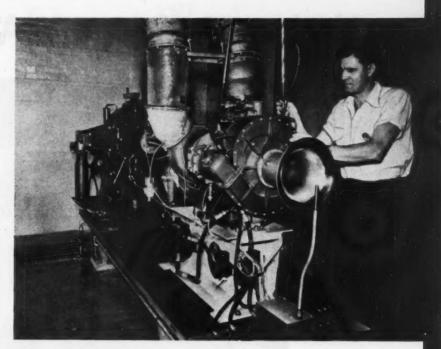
Threaded end of shaft of the first-stage turbine wheel being produced on a thread grinding machine
